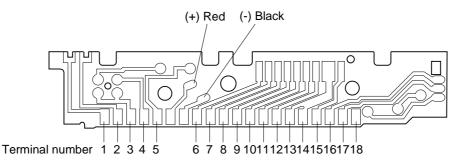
Board Assembly Terminal Arrangement Diagram
